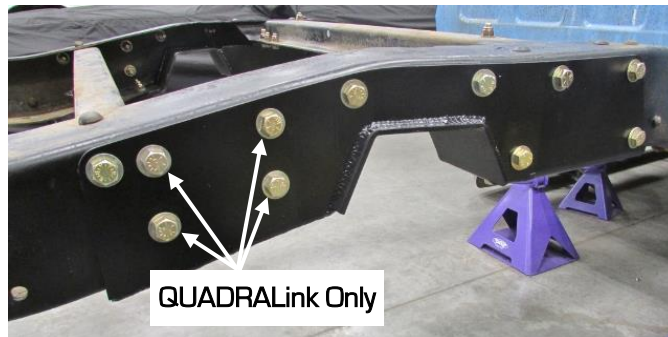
Frame Notch Assembly (RH, Passenger Side)
